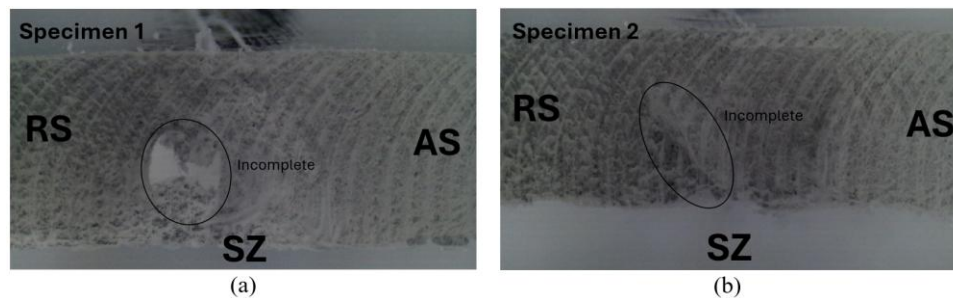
(a) Photo of macro structure of FSW result of threaded cylinder tool specimen 1, (b) Photo of macro structure of FSW result of threaded cylinder tool specimen 2
